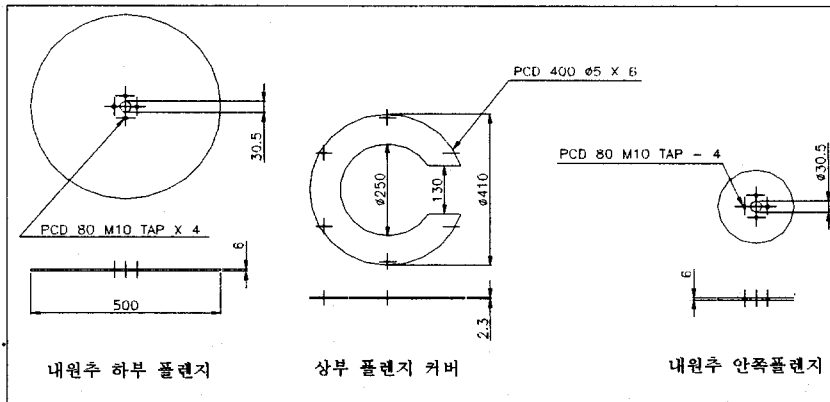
Upper and lower flange of inner cone and flange cover
